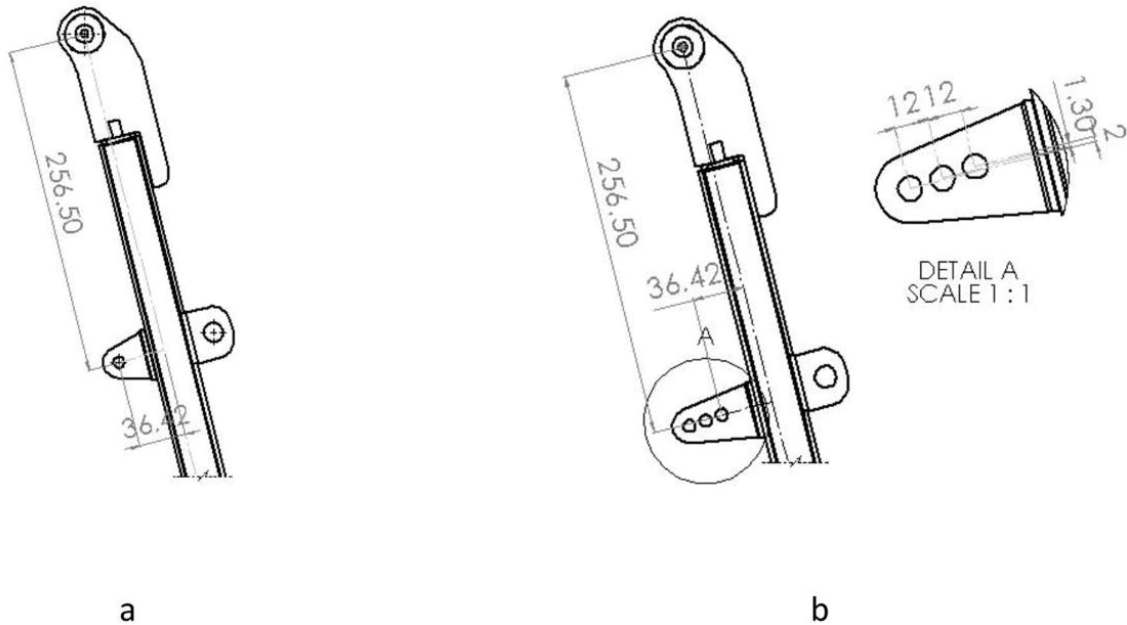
Technical Drawing of the Slot: a) Original, b) Modified version
